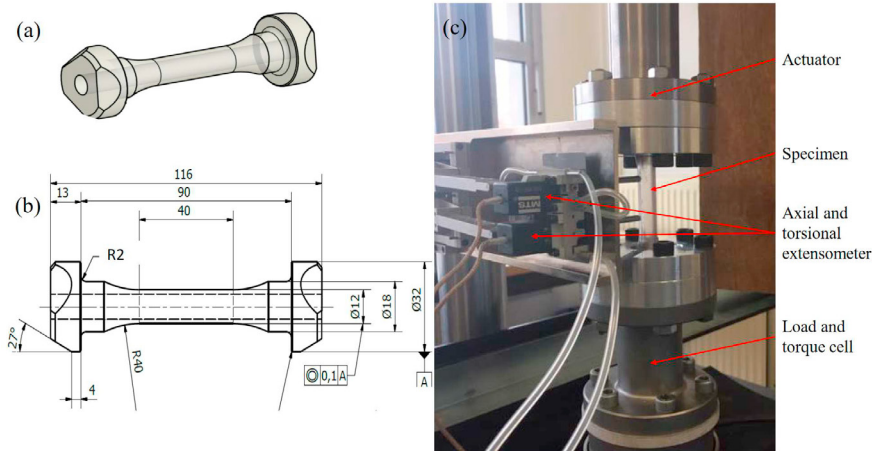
(a) Design and (b) dimension (mm) of the test specimen. (c) The testing setup.
